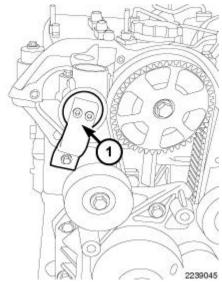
Mark Across Reluctor Wheel & Exhaust Camshaft Courtesy of CHRYSLER LLC
